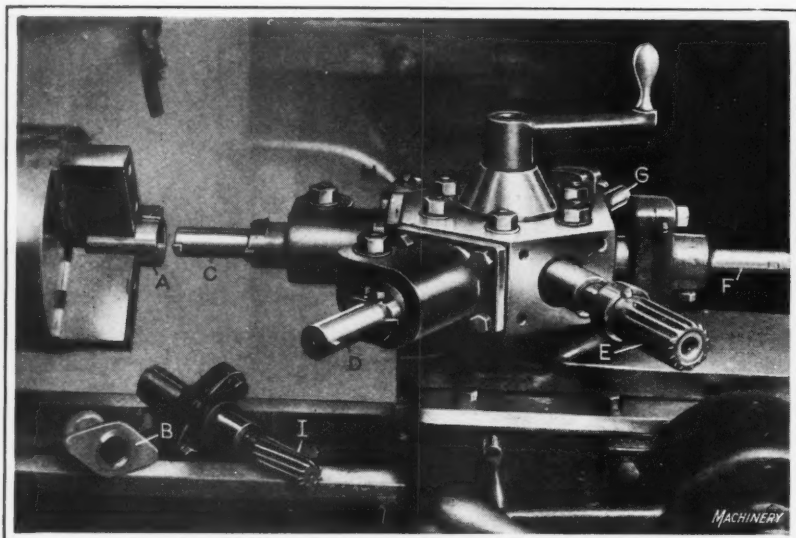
Equipment for machining Bronze Bushings for Front and Rear Camshaft Bearings
